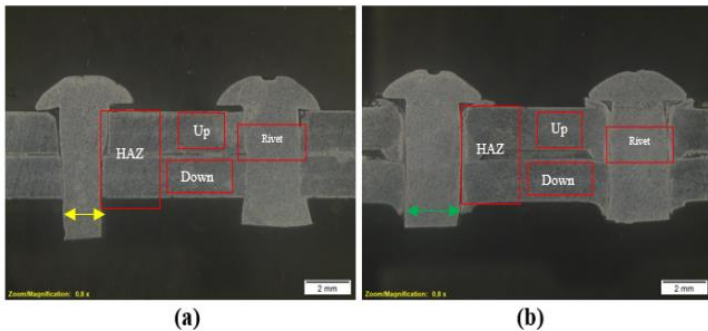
Side view of macro test results (a) drill (b) FSSW.
